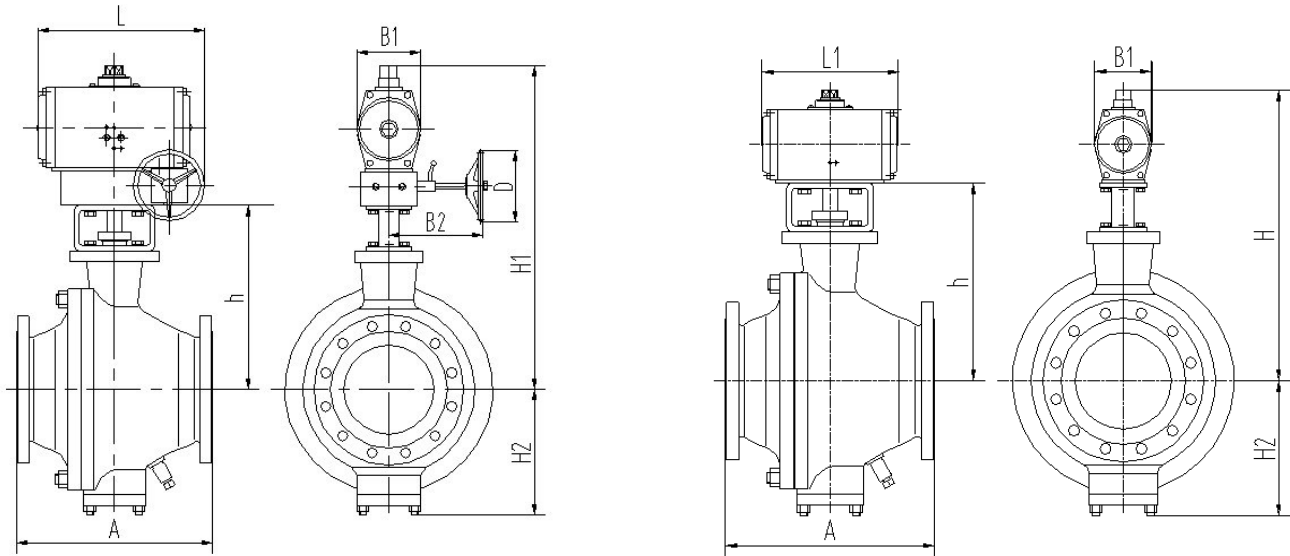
Overall Drawing With and Without Handwheel For 2" DN50~16" DN400
